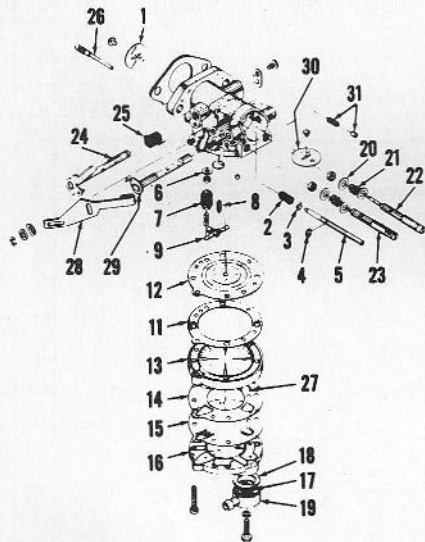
Exploded view of the Brown diaphragm carburetor used on early models. Springs (27) are located above both check valves. Choke parts (28-31) are sometimes removed when fuel primer pump (Fig. PR1-4) is installed. Refer to Fig. PR1-2 for legend except the following.
